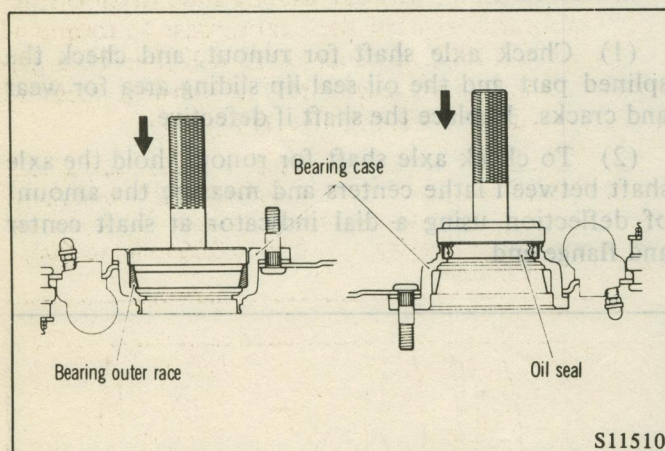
Driving in the Bearing Outer Race and Oil Seal
